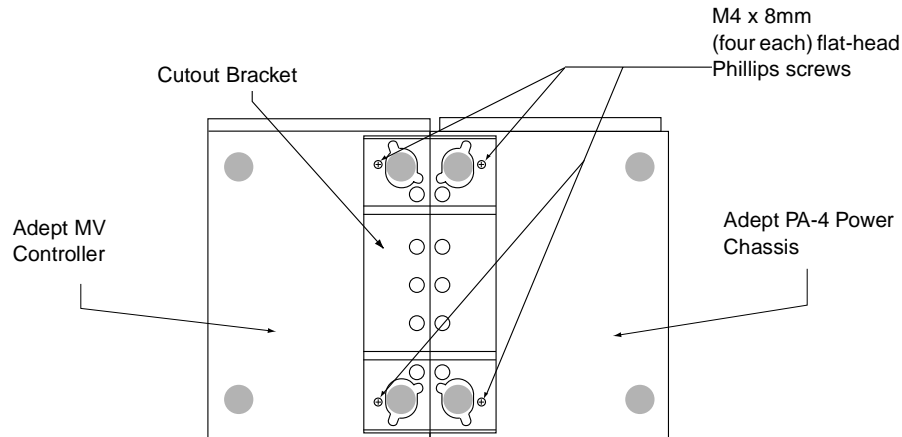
Joining the Power Chassis and Controller (Bottom View)
